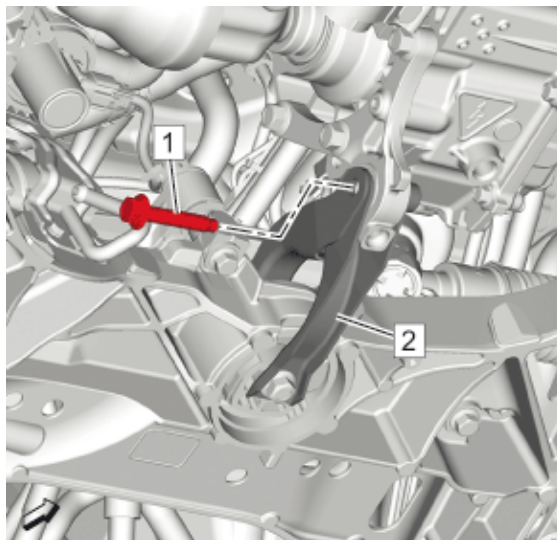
Transmission Mount Strut Bolt And Transmission Mount Strut
